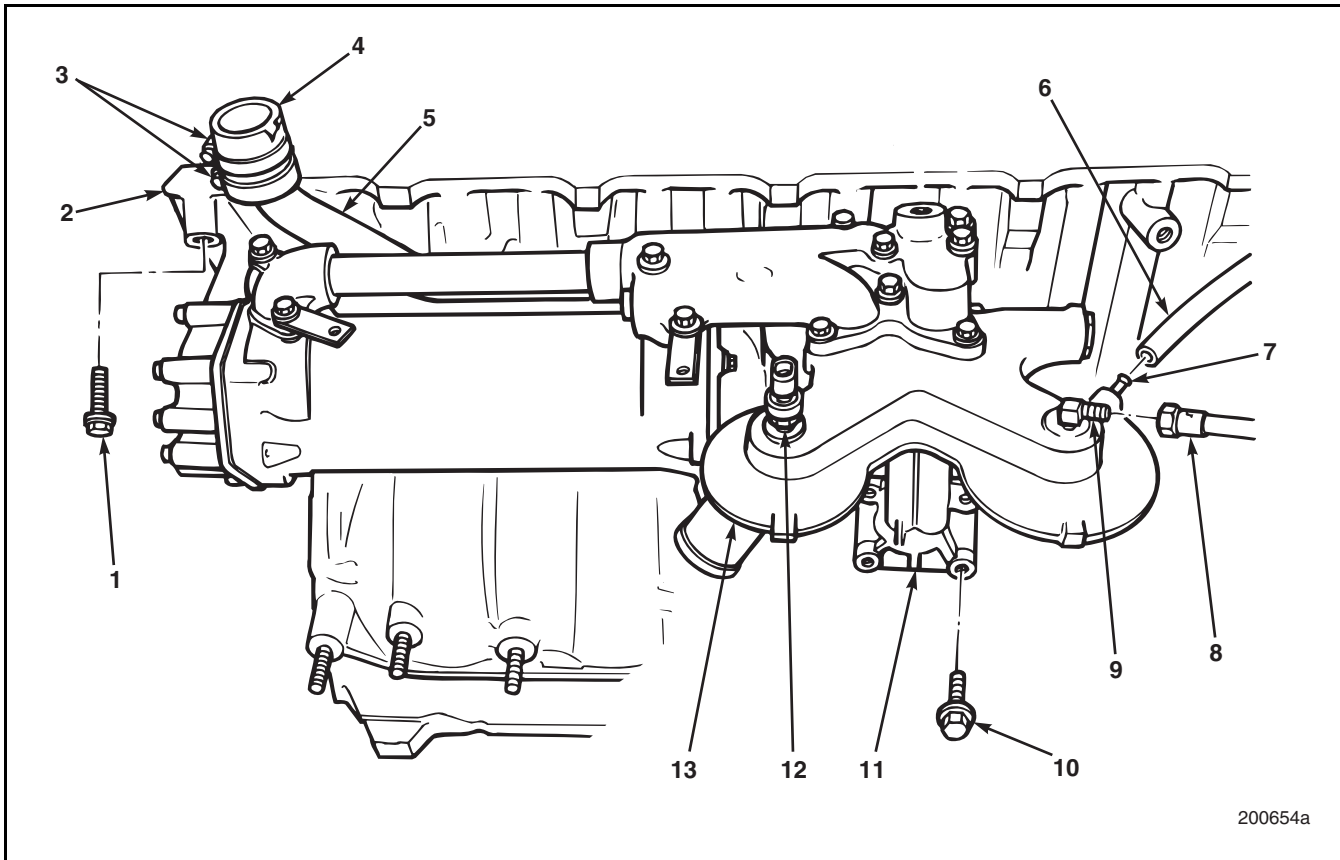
Oil Cooler and Oil Filter Head Installation
